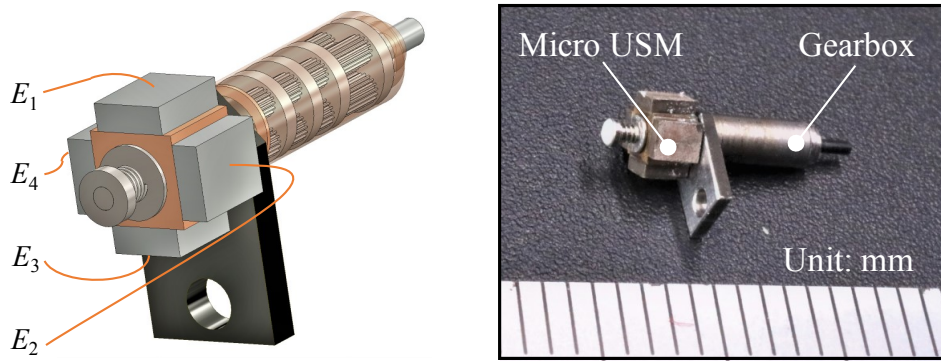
Design of the micro-g geared ultrasonic motor, a metallic flange fixes the motor and the planetary gear train.
